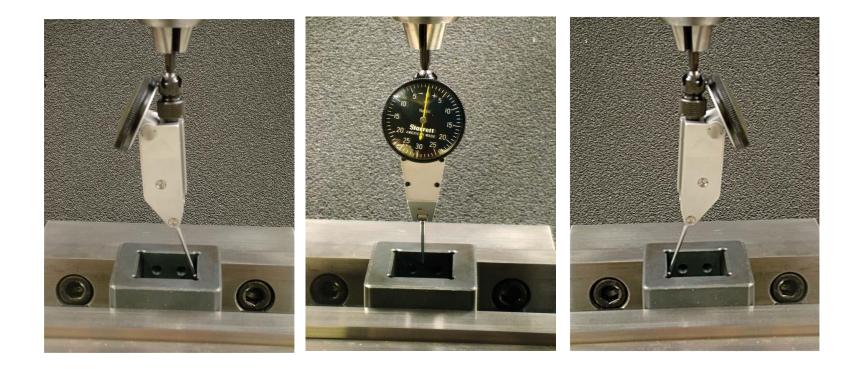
(A) Zero the dial face when the indicator is in line with one machine axis. (B) Then rotate the spindle 180 degrees and note the difference in the indicator readings. The table needs to be moved one-half of the indicator reading to center the spindle in the hole. In this case the table needs to be moved 0.005" because the indicator readings differ by 0.010".
